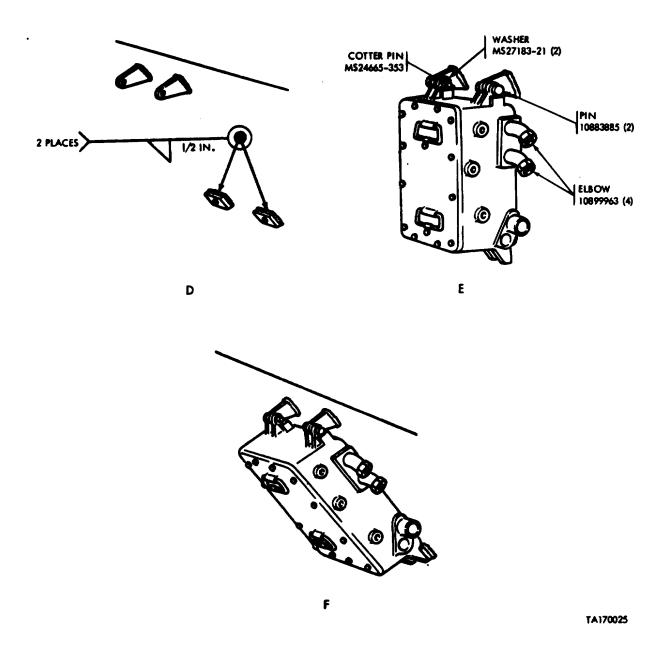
Installation of manifold assembly (sheet 2 of 2).
